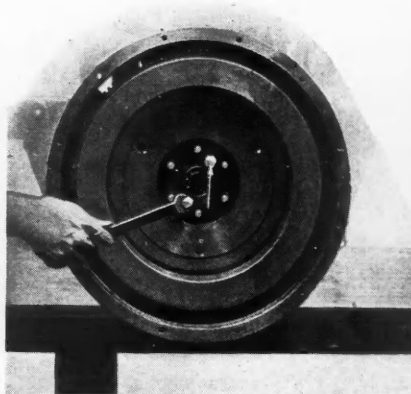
Checking flywheel with indicator. support for the instrument should be as short as possible to reduce vibration
